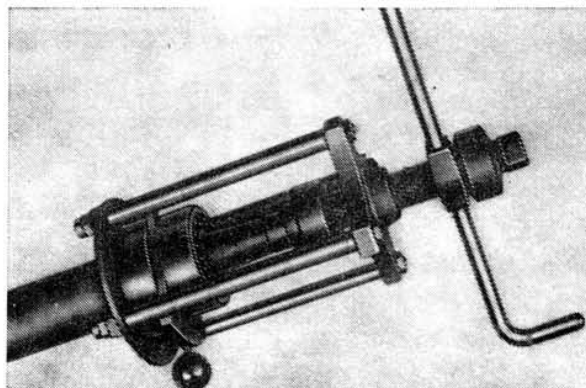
/2 - Removing Ball Bearing Using MP 5-112 Jig and Its Forked Plate
